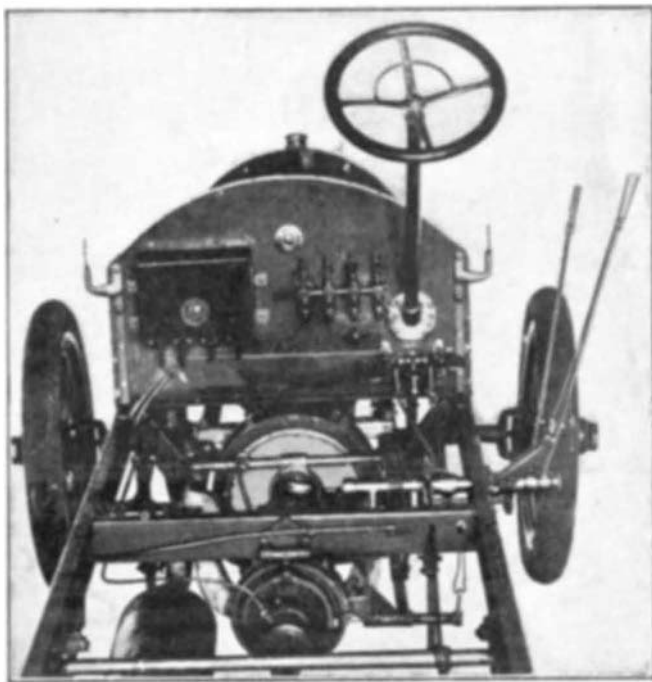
BACK OF DASH, SHOWING ENGINE FLYWHEEL AND UNIVERSAL JOINT OF PROPELLER SHAFT.
